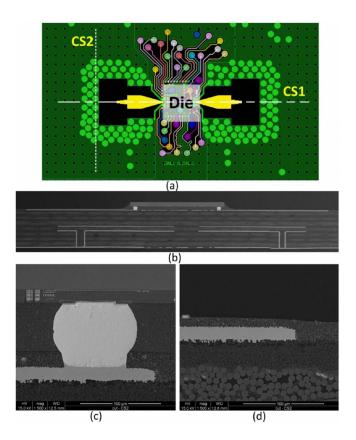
Scanning Electron Microscope (SEM) Imaging of the SiP. (a) Definition of the two cross sections (CS1, CS2), (b) CS1 SEM image, (c) SEM image of a flip-chipped solder bump, and (d) solder mask on top metal layer. solder mask.
